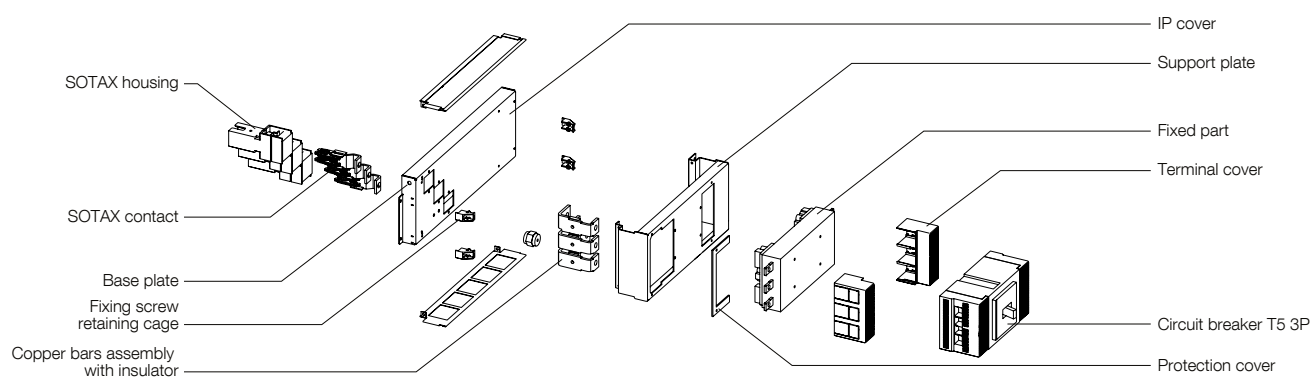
Exploded view of plug-in module with copper connection to main contacts
